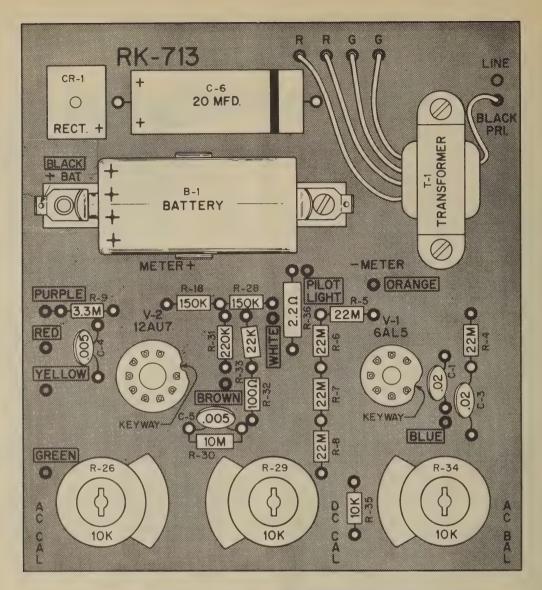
MOUNTING THE PARTS ON THE PRINTED CIRCUIT BOARD
